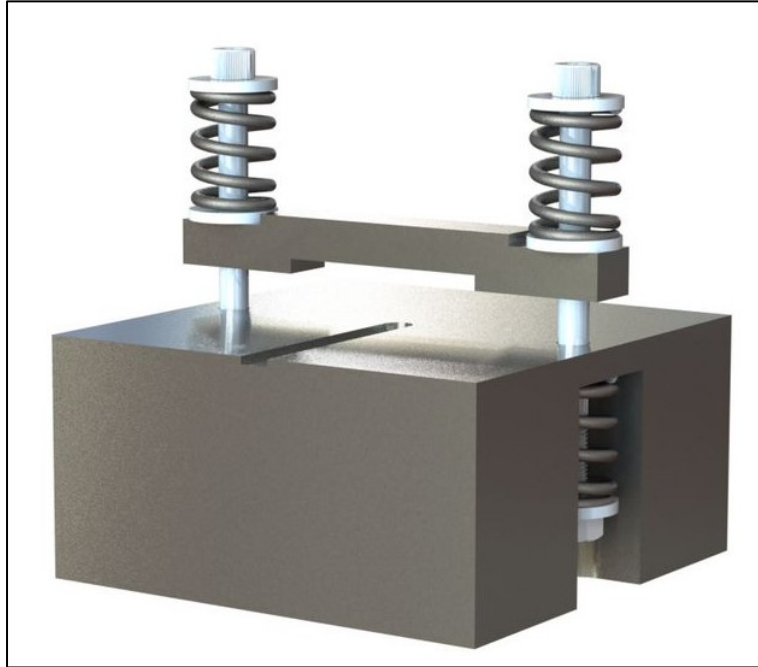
Test jig stand with the steel base block, crossbar, spring, nuts, washer, and bolts. The purpose of the jig is to provide the necessary 100 psi of pressure along with the adhere to the combustion chamber.
